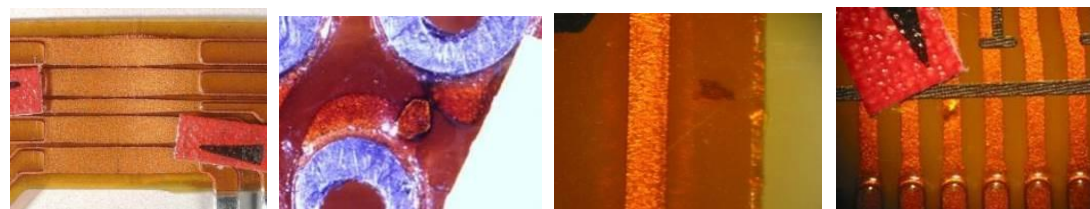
Examples of insufficient spacing between conductors, copper residue between pads, copper residue to edge of flex, bump on conductor (left to right)
